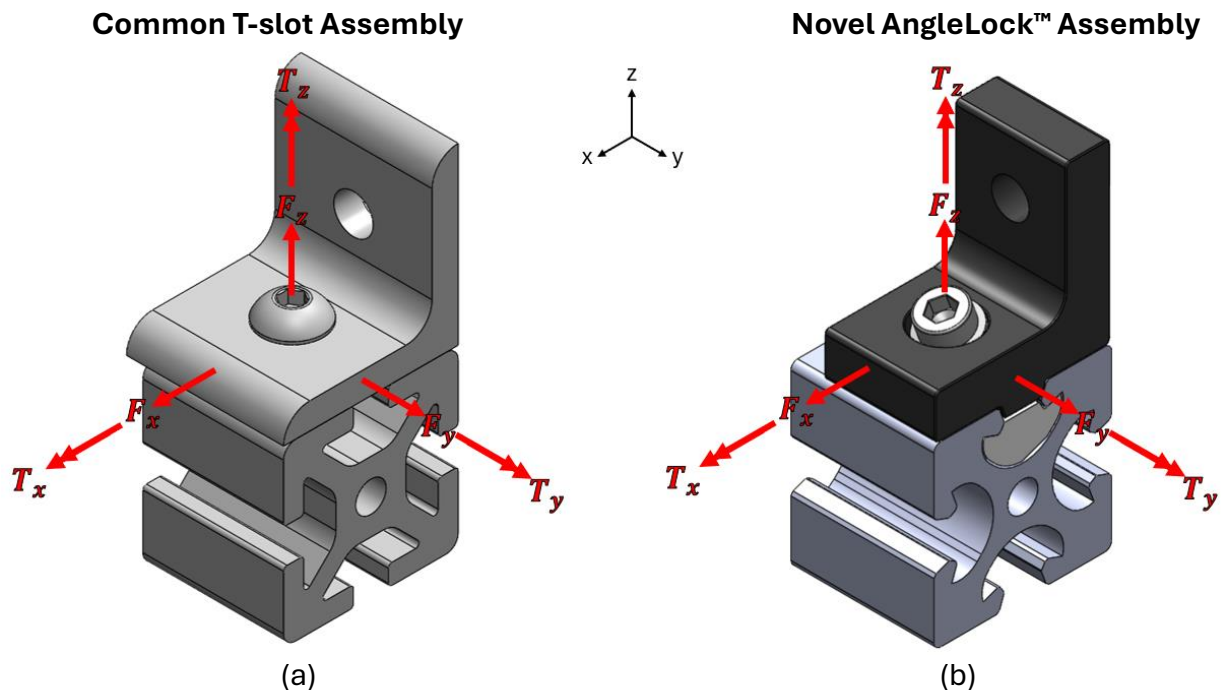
Isometric view of (a) common T-slot assembly for a corner bracket and (b) AngleLock™ assembly for a corner bracket
